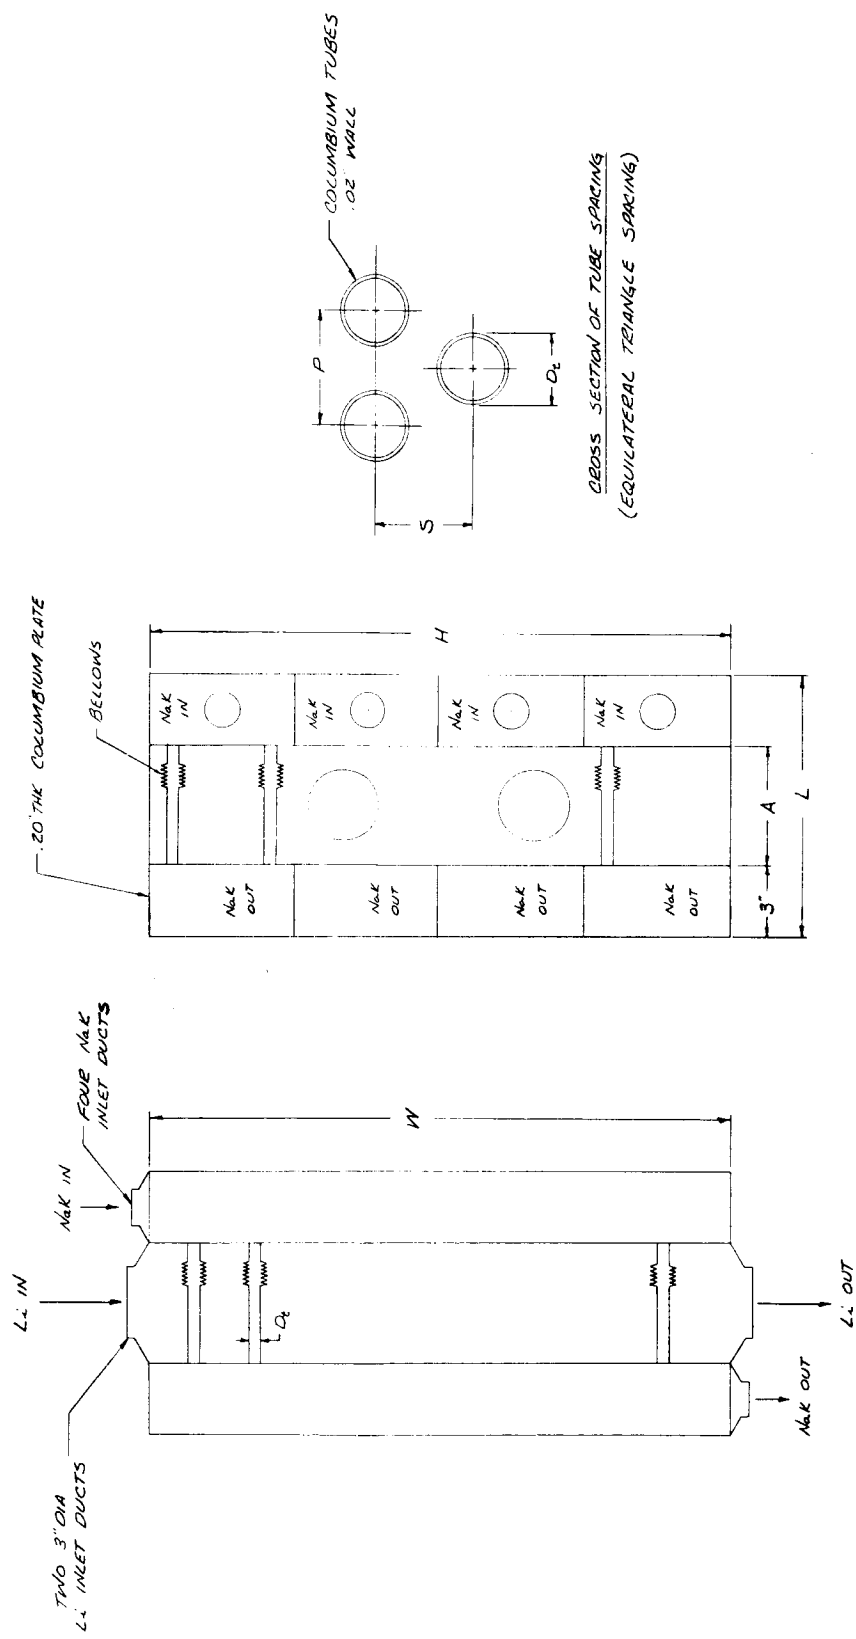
Cutaway Views of Straight Tube Heat Exchanger
